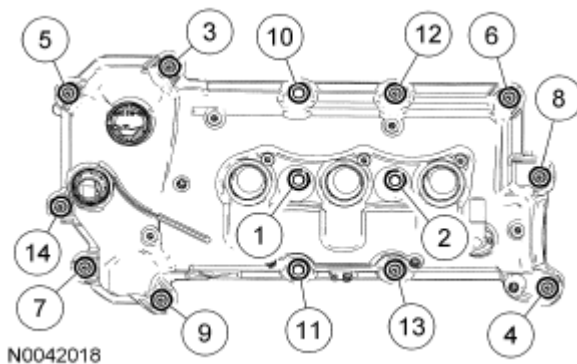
Locating Tightening Sequence Of LH Valve Cover Bolts
